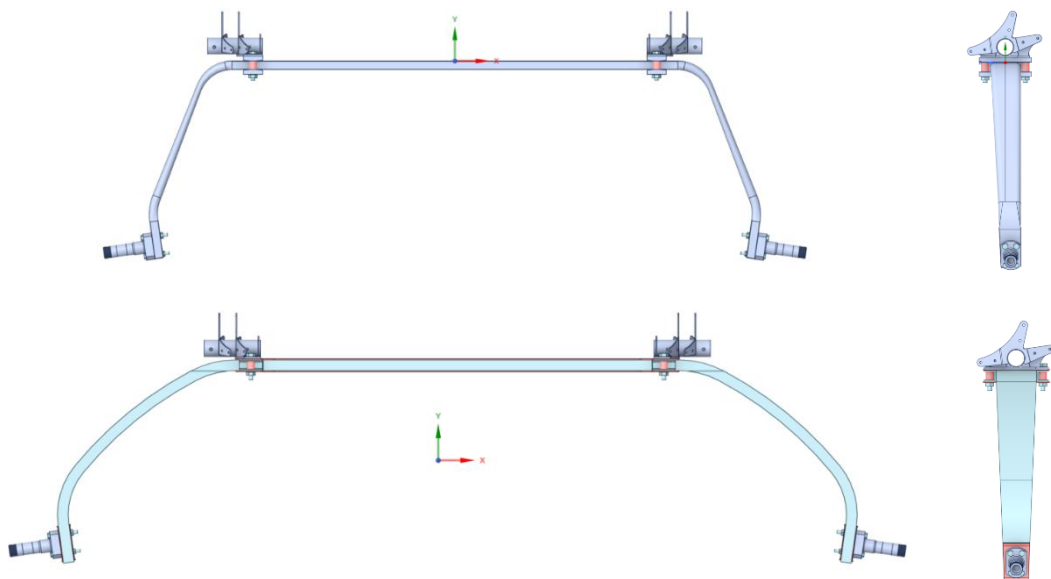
Aluminium 7075 T6 (Top) vs Composite Undercarriage Assembly (Bottom) (Front and Side View)
